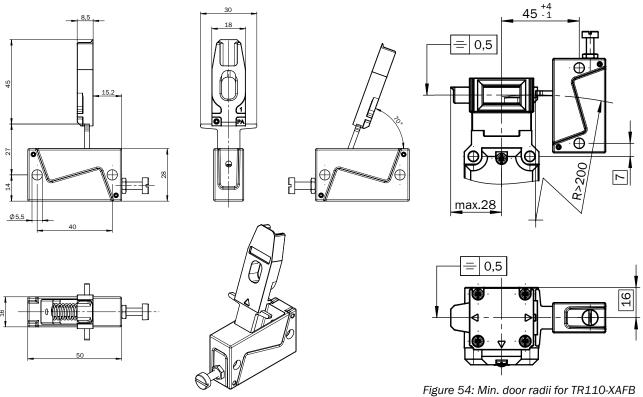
Dimensional drawing of TR110-XAFB hinged actuator (mm)
